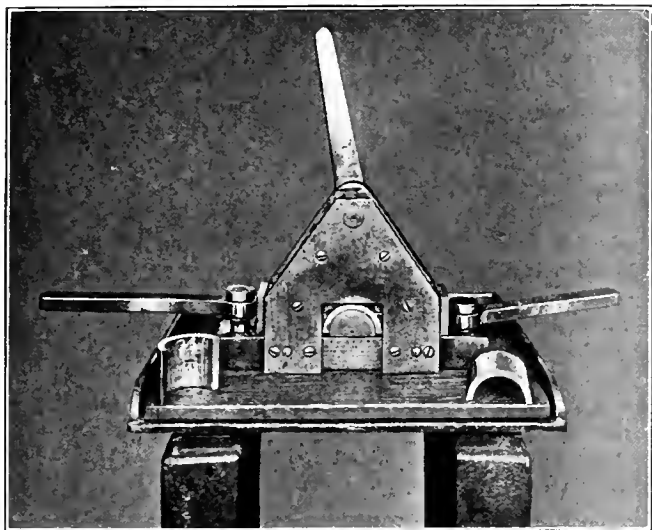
MACHINE FOR BENDING BEARINGS—OPERATION 12
